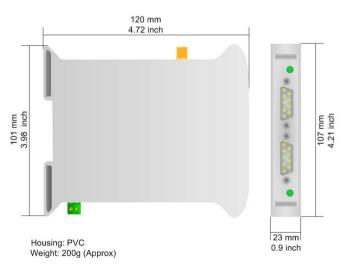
Mechanical dimensions scheme for HD67300-011-A5, HD67300-021-A5
